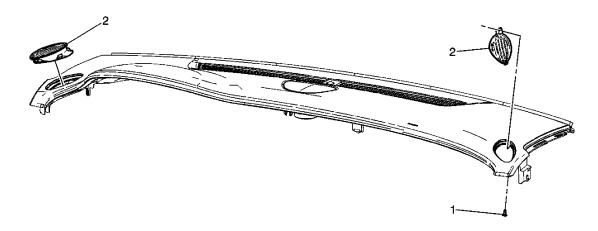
Identifying Side Window Air Outlet Courtesy of GENERAL MOTORS CORP.
